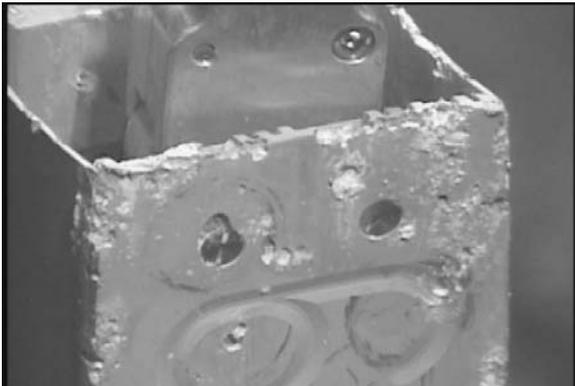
B. RA-3 Assembly #219 Examined Underwater in SRS L-Basin Shows Loss of Corrosion Nodules and No Evidence of Additional Corrosion Attack. The Stainless Steel Screws Have Been Removed.
